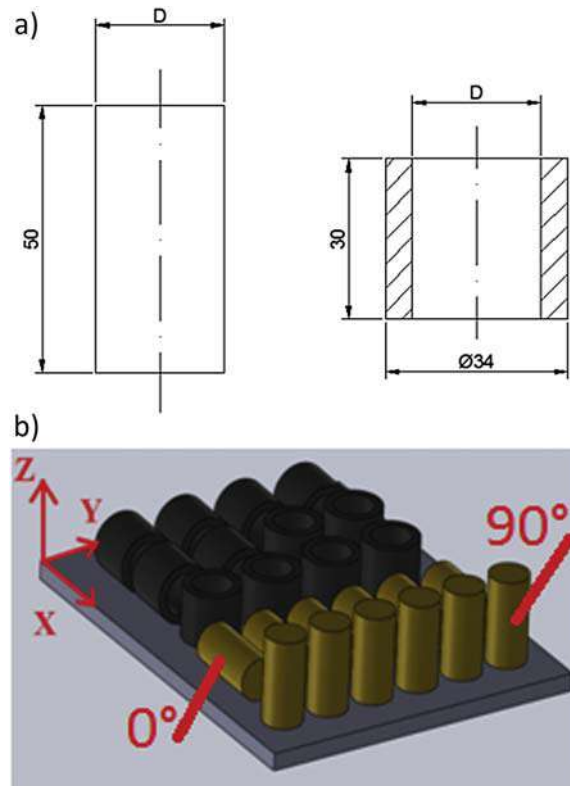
Tested samples: (A) geometric dimensions, (B) location of CAD models [9].
